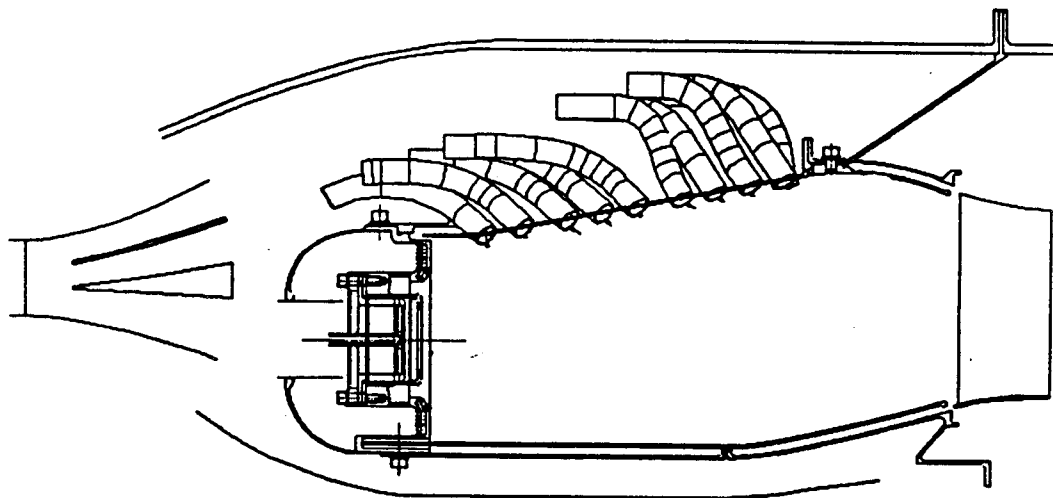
Mechanical layout of the MRA combustor with curved tubes. The details of a practical fuel injector design for the IMFH tubes were never defined.
